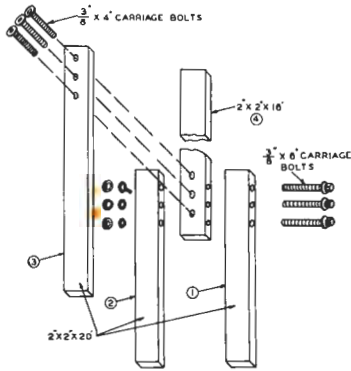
EXPLODED VIEW of the middle joint between the legs and top section (Parts 1, 2, 3, and 4). Bolt holes are spaced 15 inches apart.
